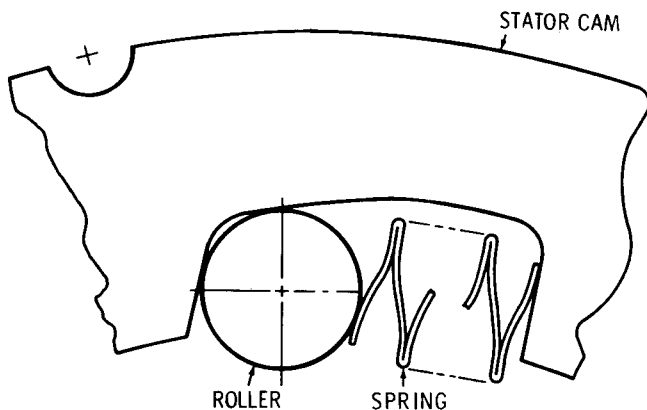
Spring and roller installed in stator cam —view at rear
